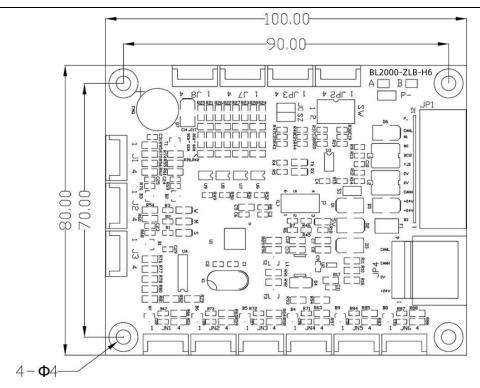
Component location and dimension of BL2000-ZLB-H6
